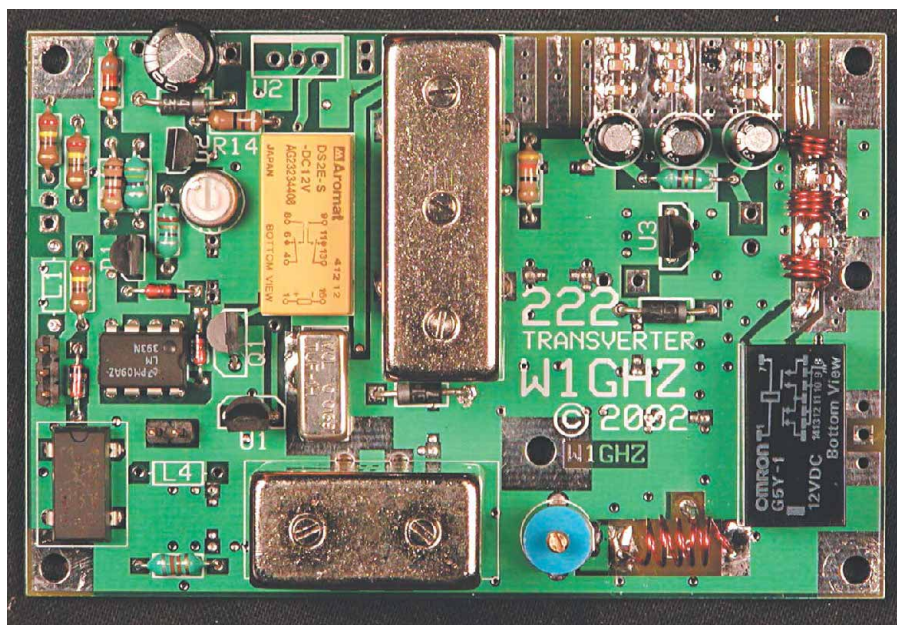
A top view of the transverter board. The main helical filter, FL2, can be seen at the board center, mounted vertically.
